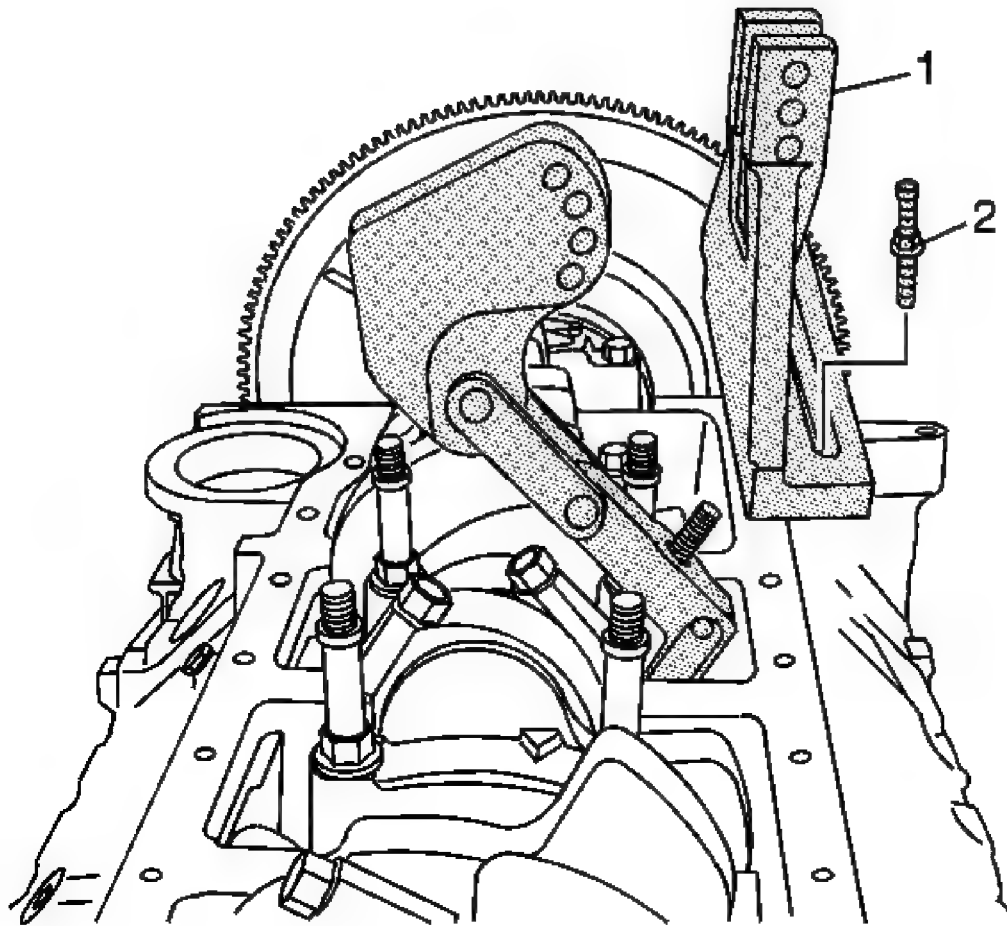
Installing Base & Bolt To Oil Pan Rail
